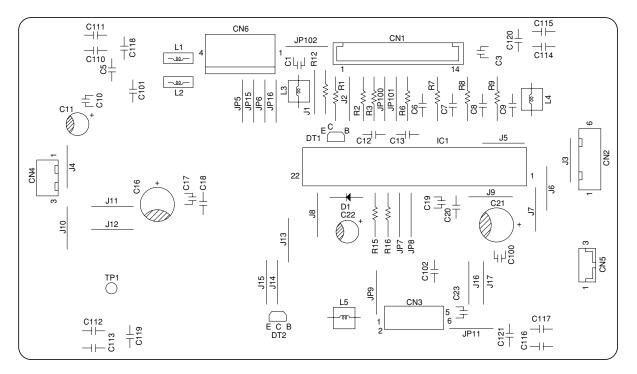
Scanner drive motor PCB silk-screen diagram
